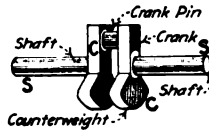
Solid forged crank and shaft for a center-crank engine.
